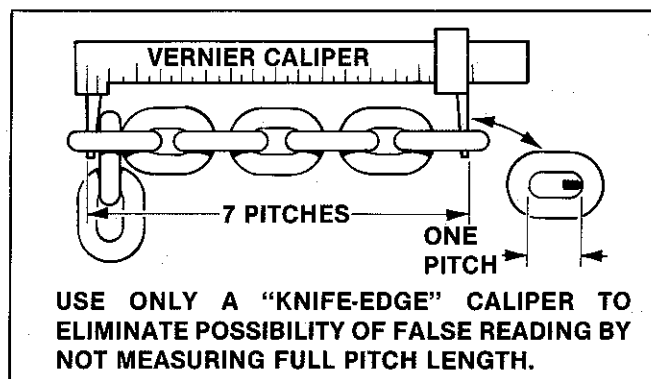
Checking Coil Load Chain Using Vernier Caliper
